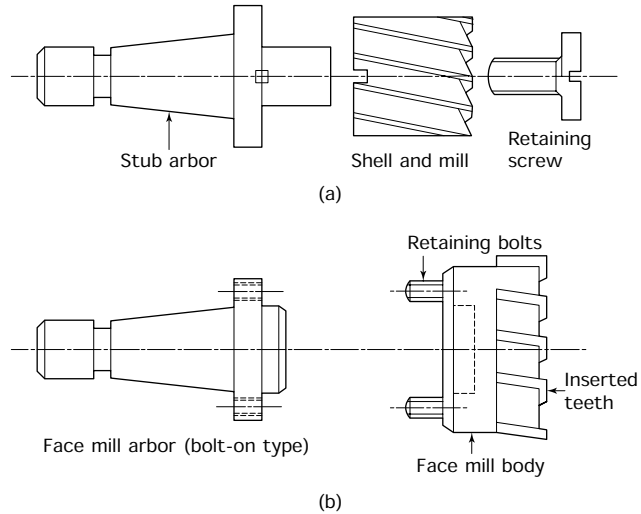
Use of stub arbors: (a) shell end mill; (b) face mill
